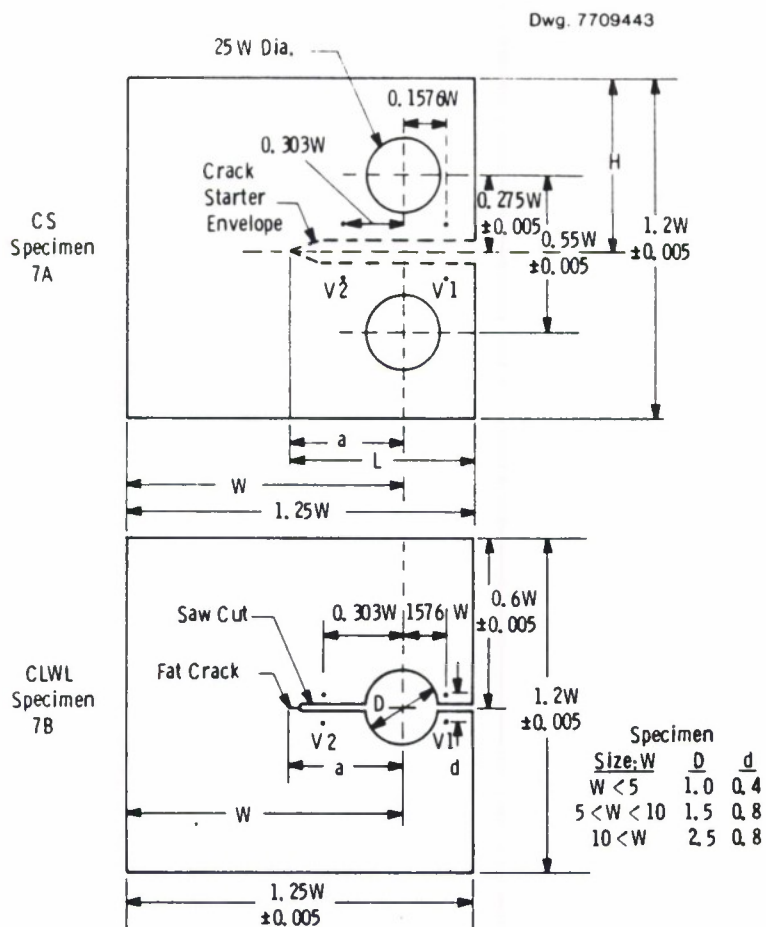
Compact and Crack-Line-Wedge-Loaded Specimens
